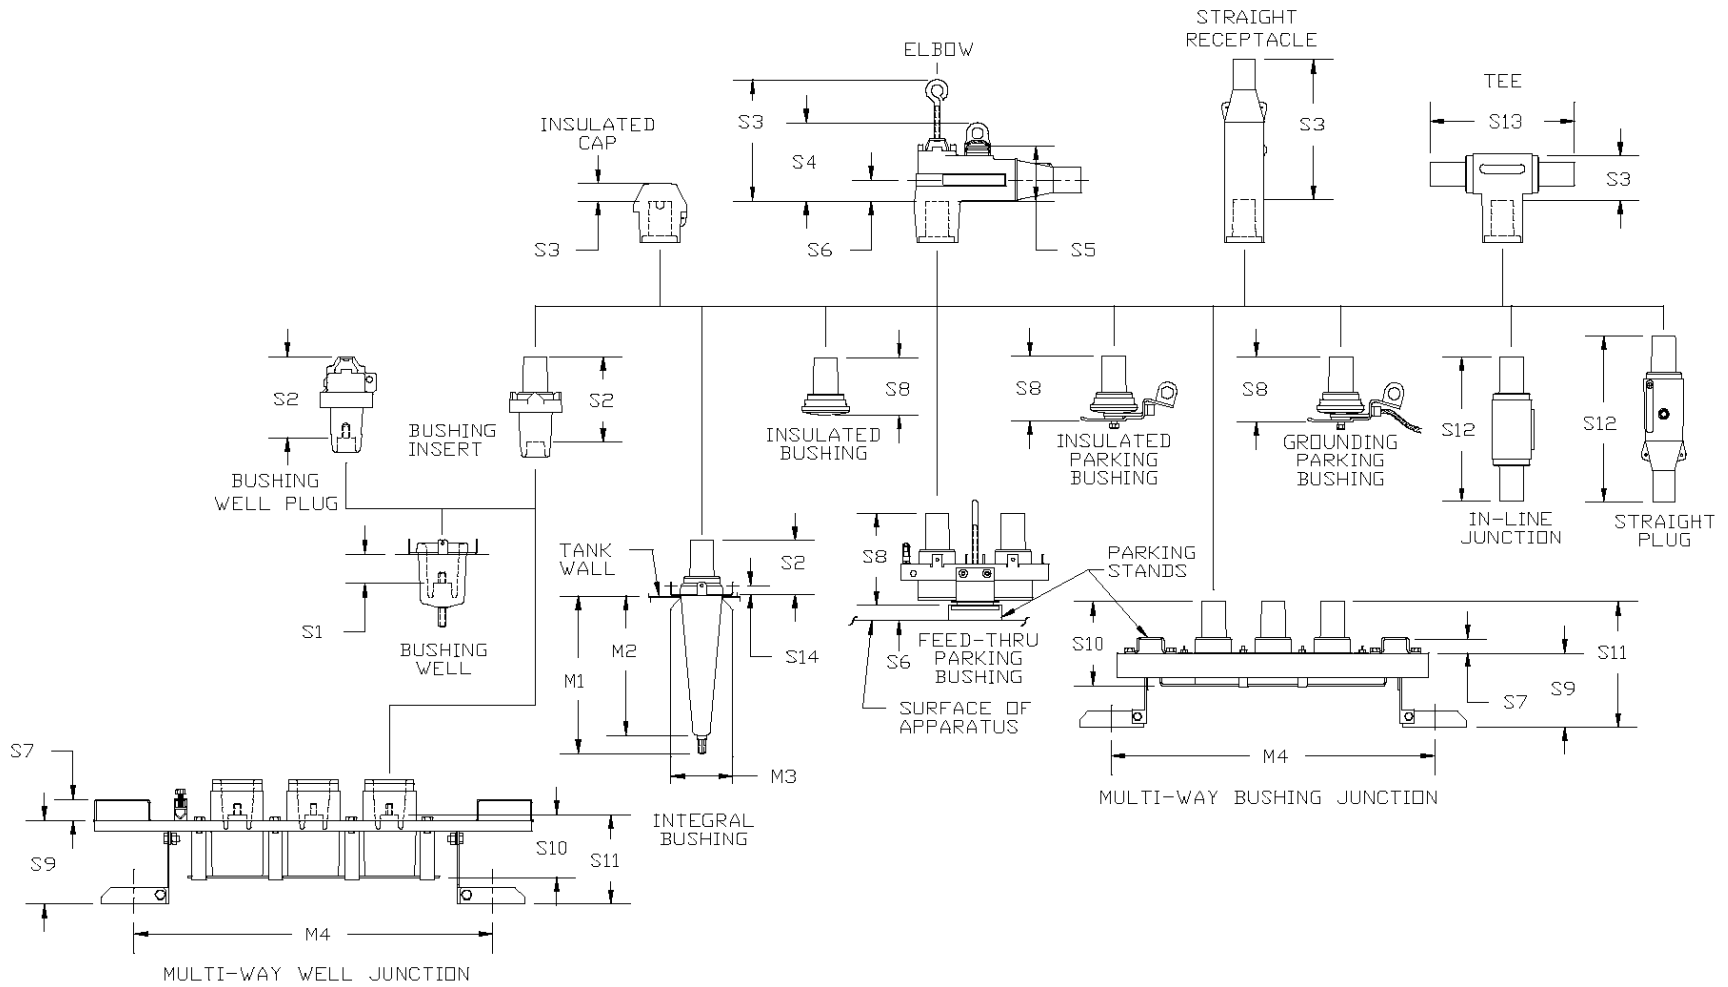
Stacking dimensions for 600 A deadbreak separable insulated connector system
